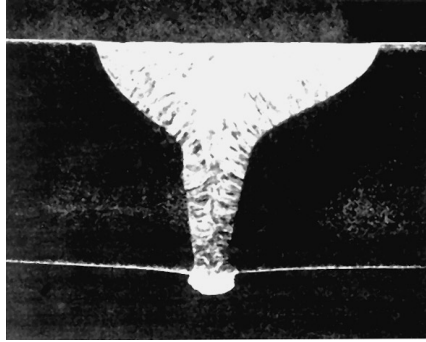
A plasma arc weld made in 13-mm-thick 304 stainless steel with keyholing. From Lesnewich (8).
